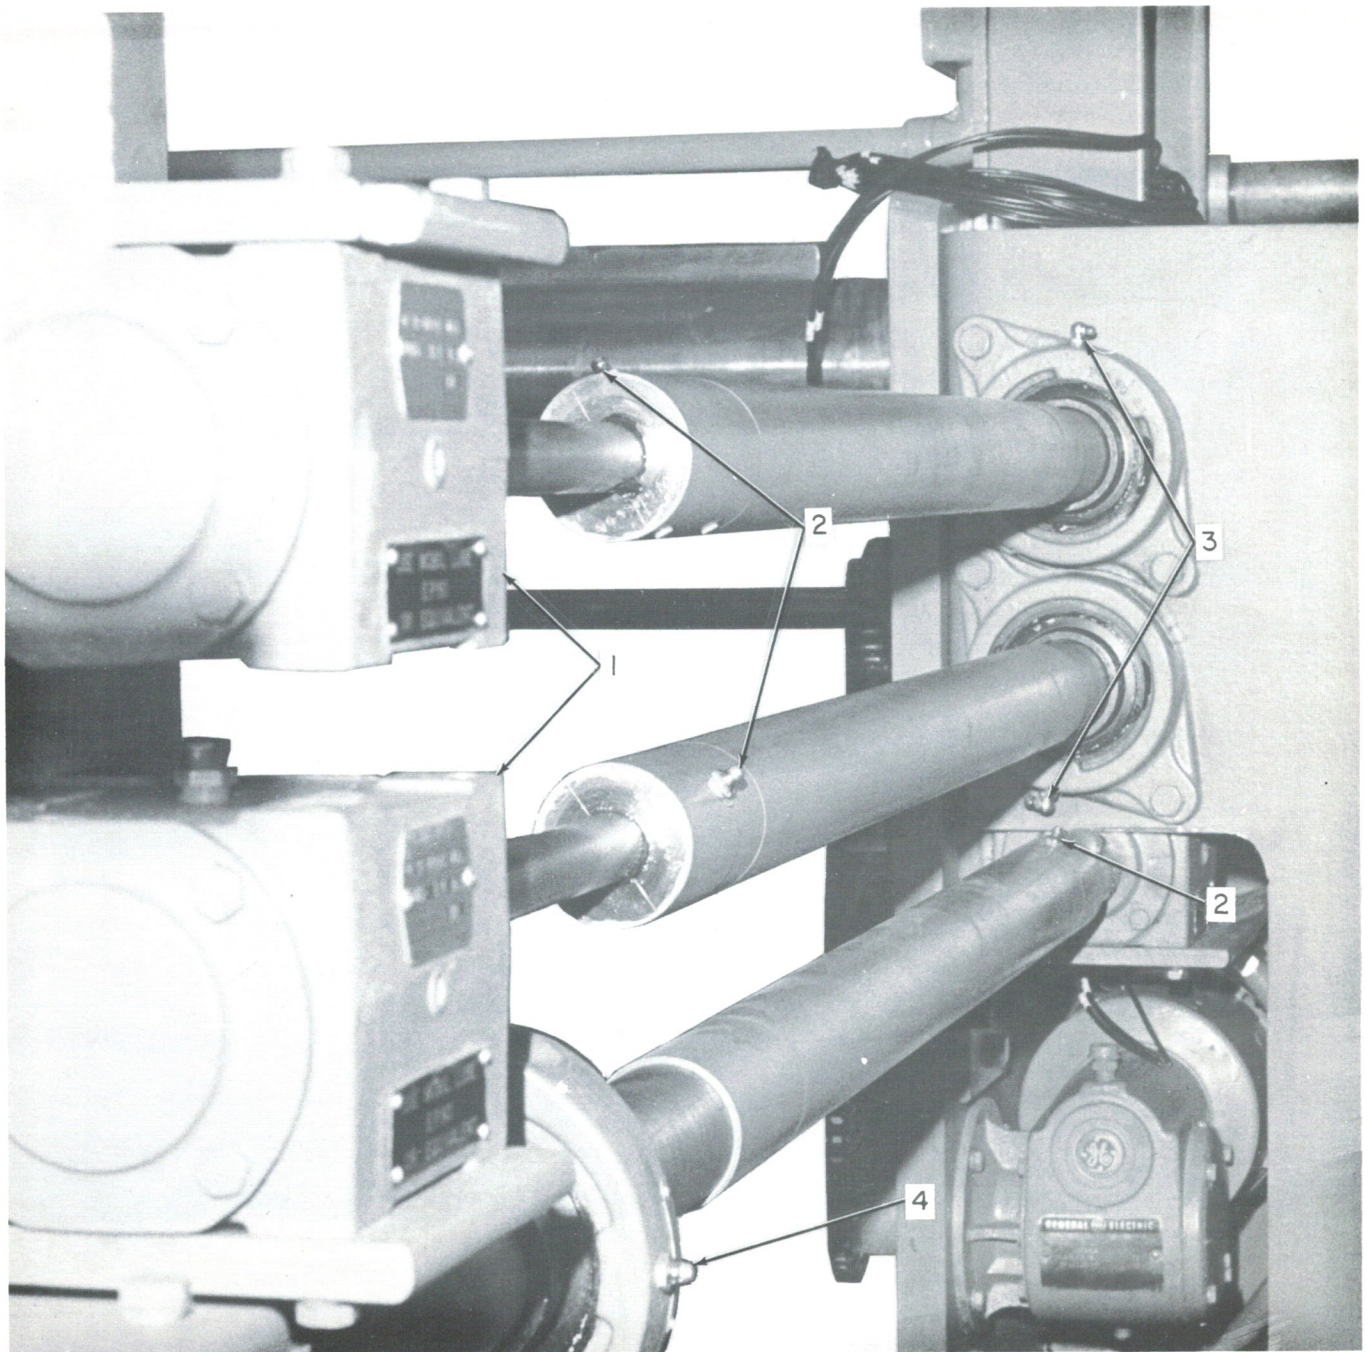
FOLDING SECTION LUBRICATION (VIEW 2)
